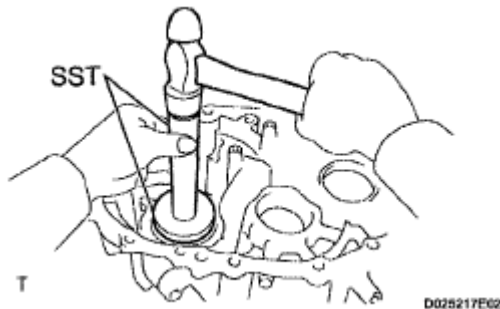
Installing Front Differential Case Tapered Roller Bearing Front Outer Race To Transaxle Housing
